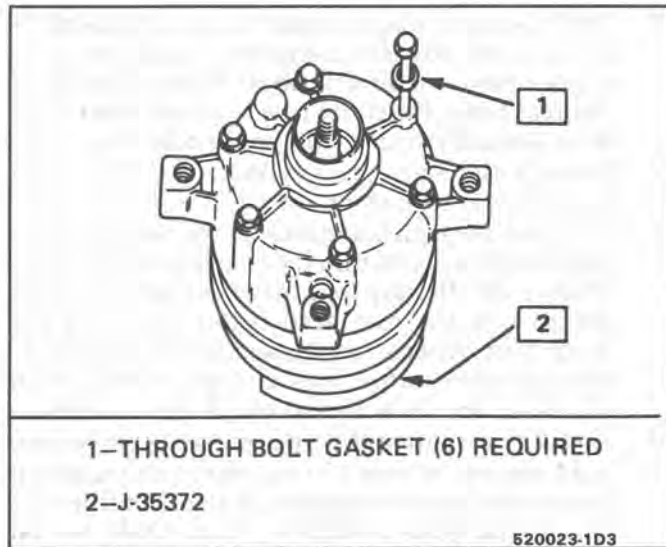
Front Head Installed: Thru Bolts and Gaskets In Place
